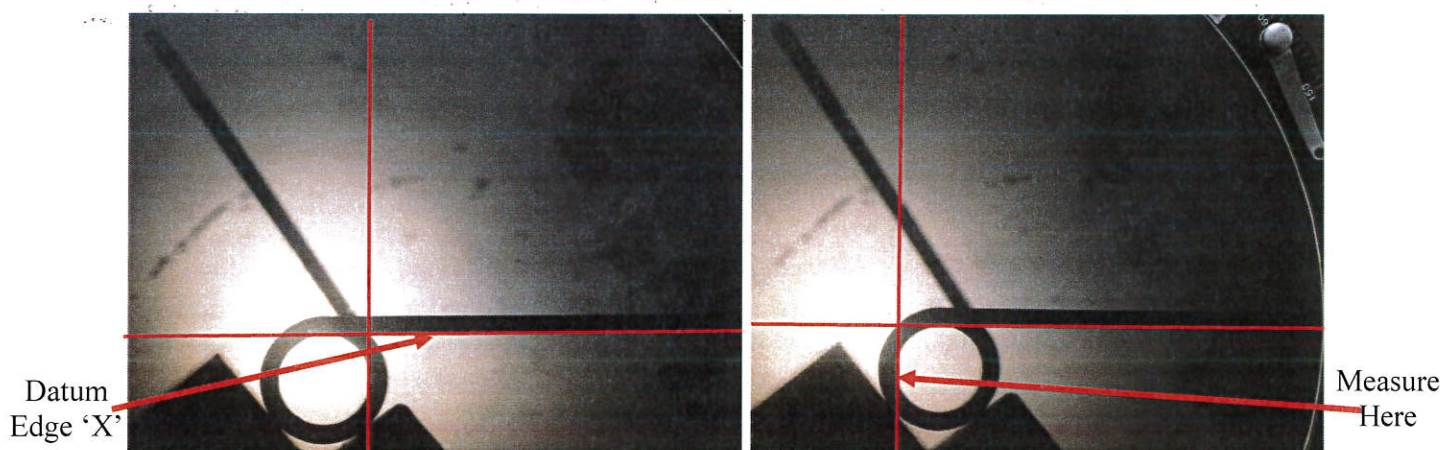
Inside edge of Internal Diameter shown with enhanced axis lines.
